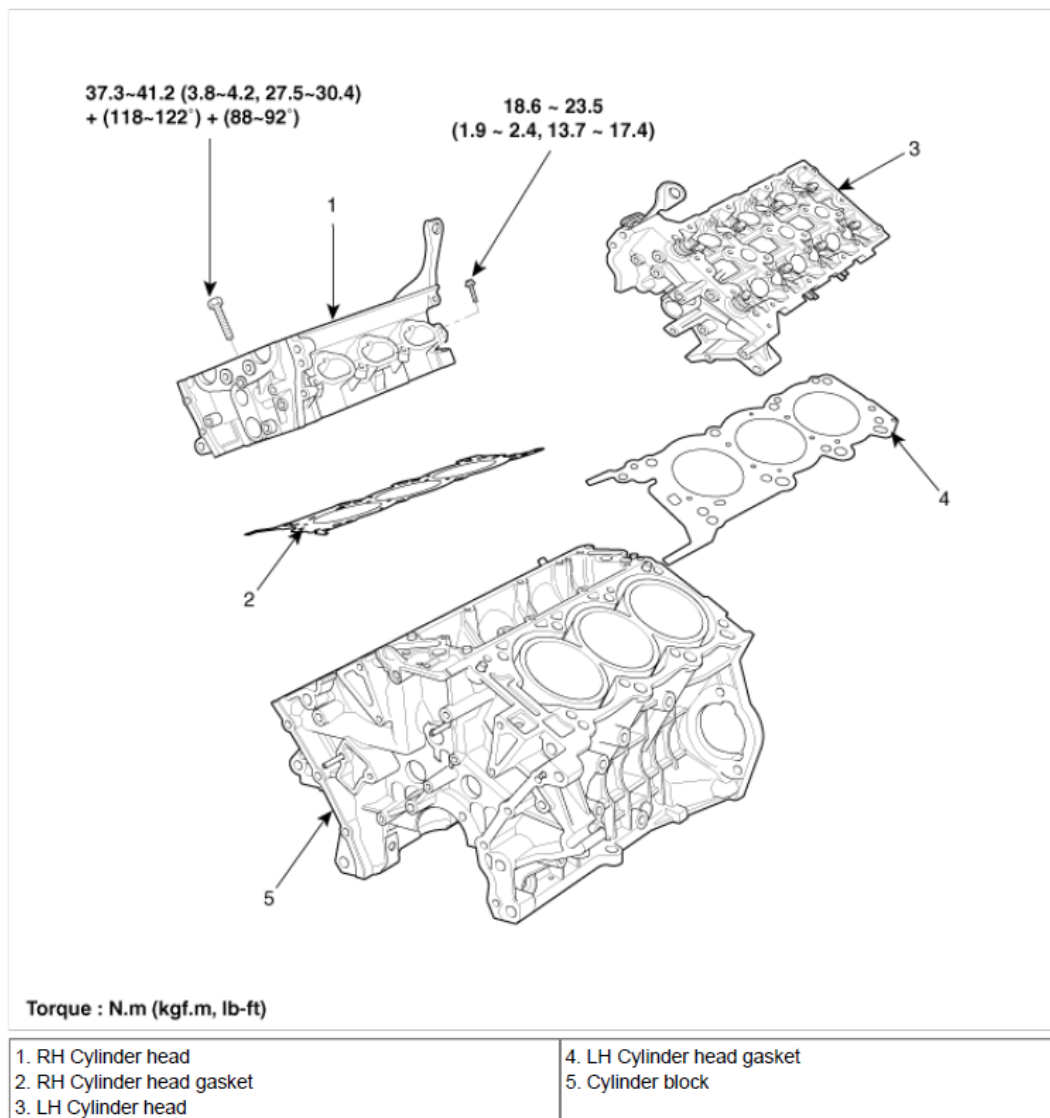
Identifying Cylinder Block, Cylinder Head And Gasket With Torque Specifications (Right And Left)
